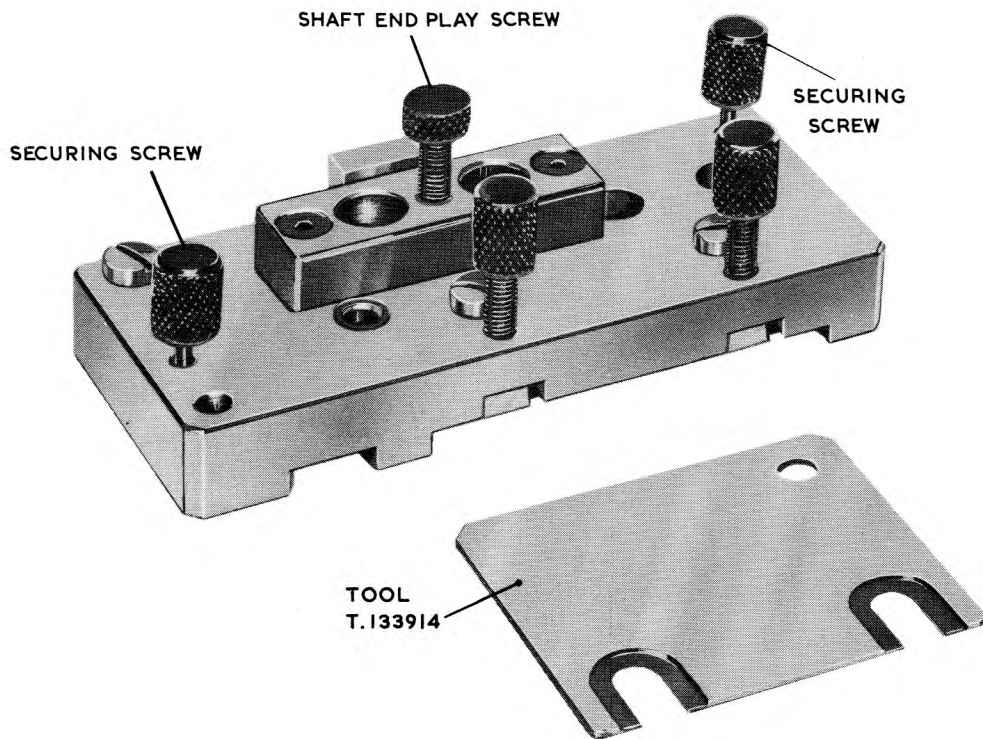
Drill jig Ref. No. IOAG/964 and tool T.133914
